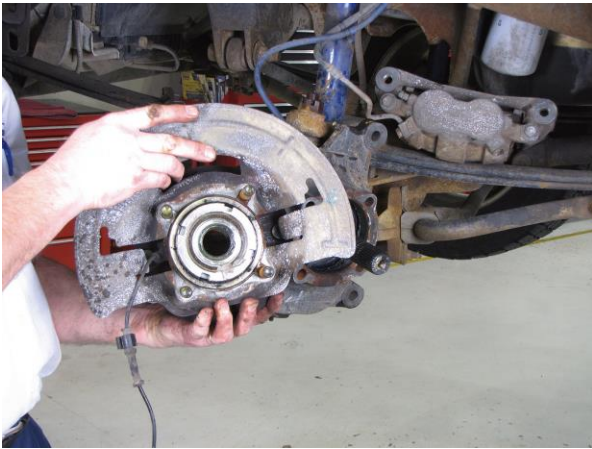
After removing the rotor and the attaching nuts the wheel bearing can be removed.
